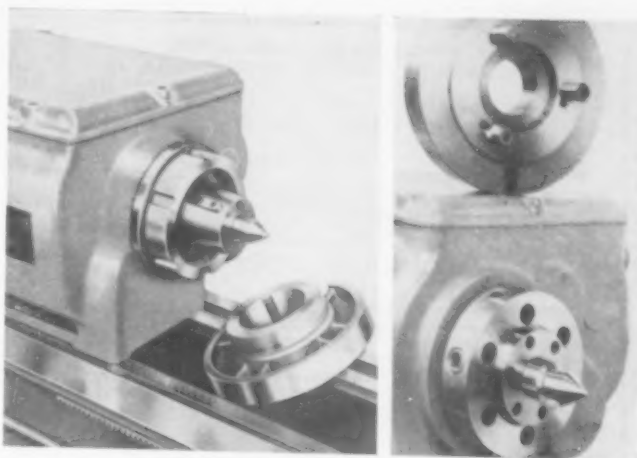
Lathe headstock equipped with taper key drive spindle nose.
